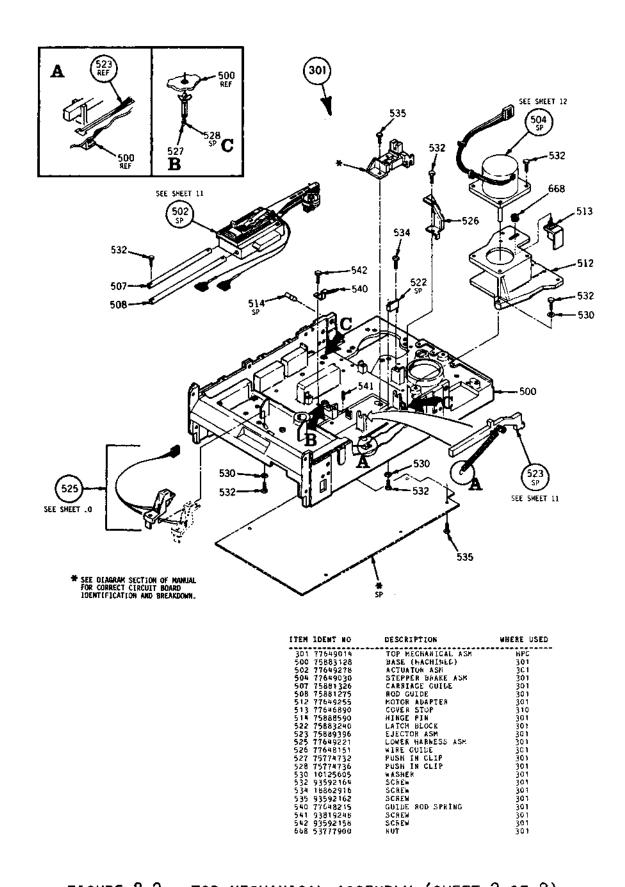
TOP MECHANICAL ASSEMBLY (SHEET 2 OF 2)
